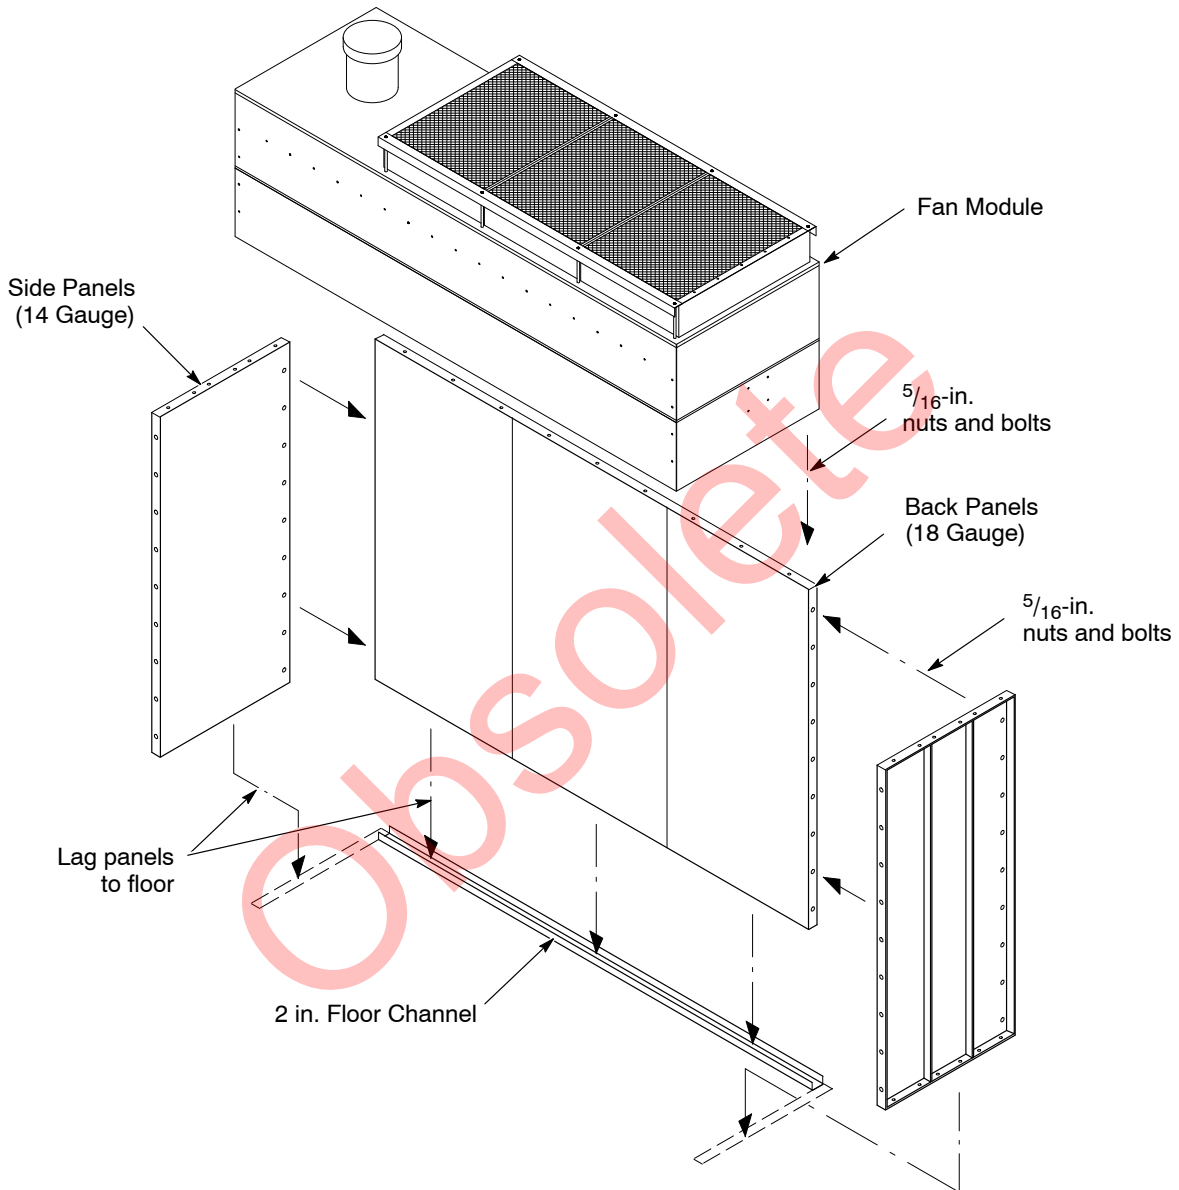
Booth Assembly (8,000 CFM Collector Shown)
